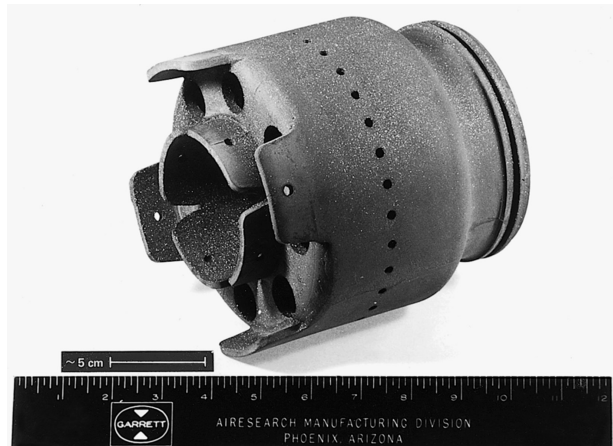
d: An example of a complex-shaped gas turbine combustor formed via slip-casting, taken from<sup>24</sup>
